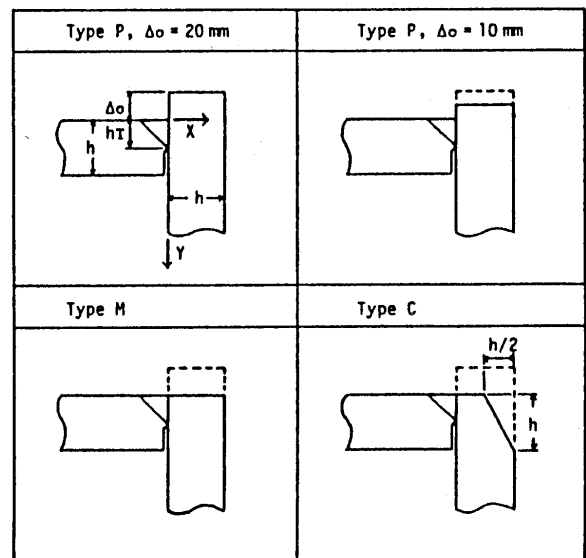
Corner joint weld cracking test (CJC-test) apparatus
